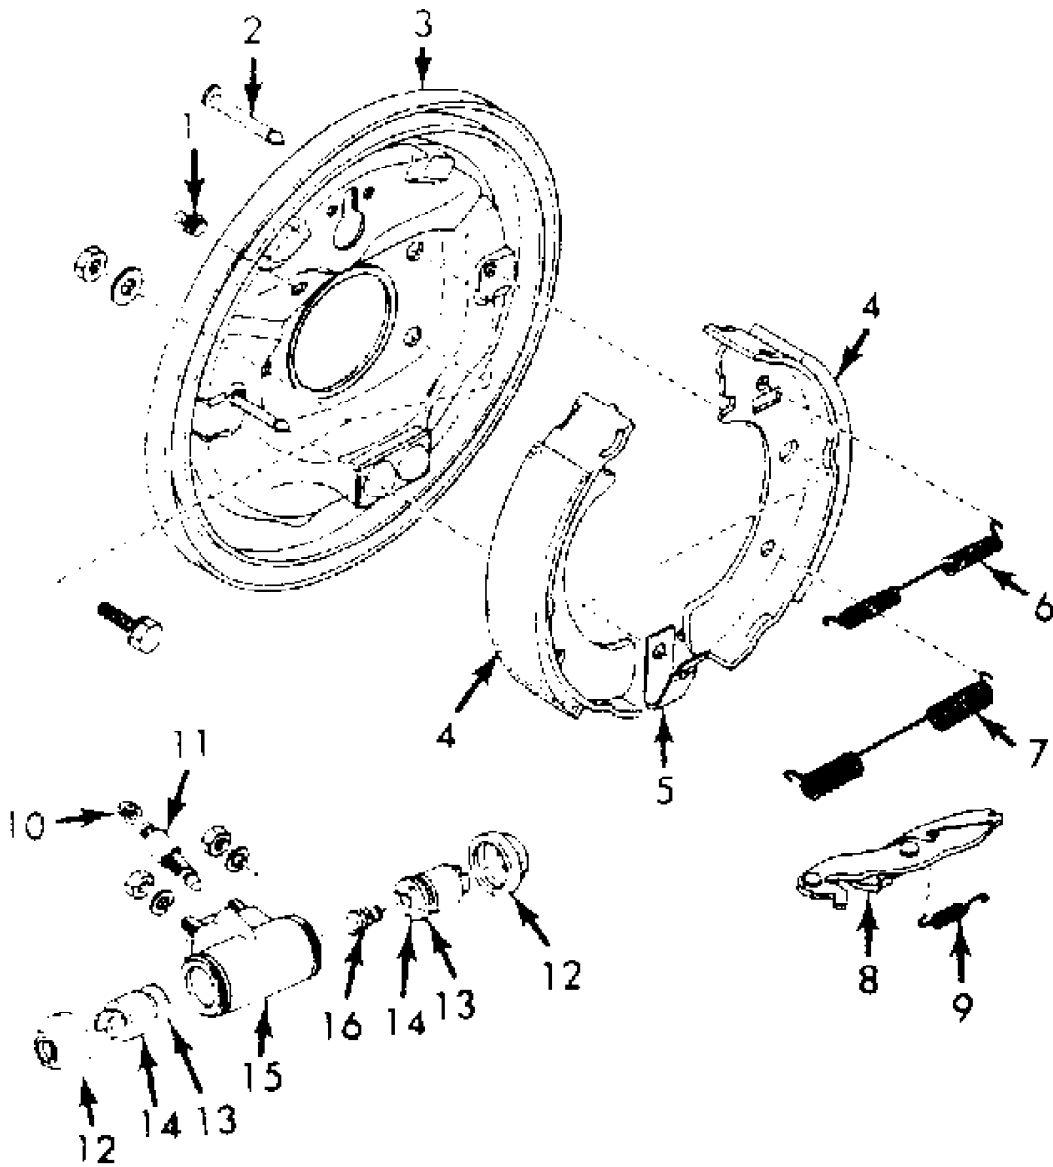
Identifying Rear Drum Brake Components (Loyale 2WD)
